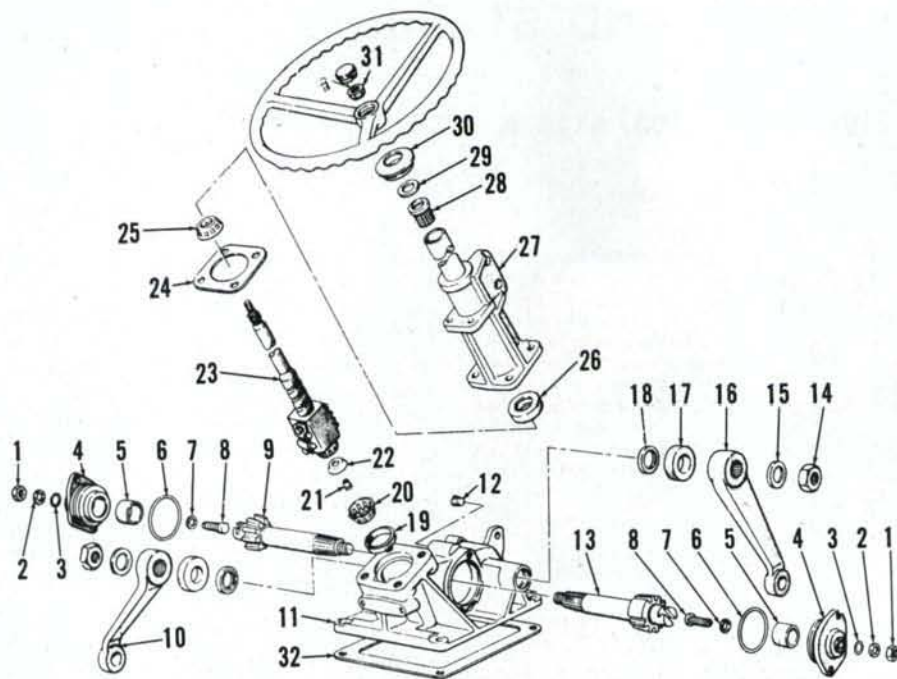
Exploded view of 2000 and 3000 manual steering gear assembly. Wormshaft (23) end play is adjustable by varying thickness of shims (24); sector shaft end play is adjusted by screws (8). Select a shim (7) that will provide zero to 0.002 clearance between head of adjusting screw (8) and slot in sector shaft (9 or 13).
